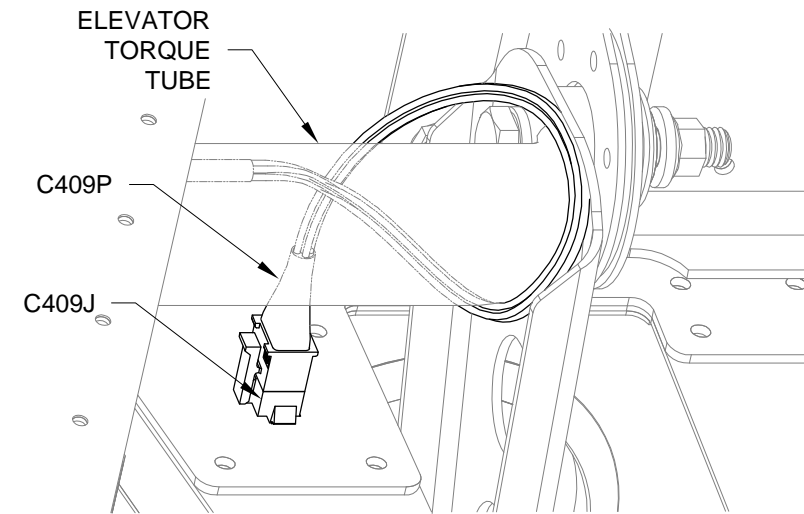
CONNECT ELEVATOR TRIM WIRES
